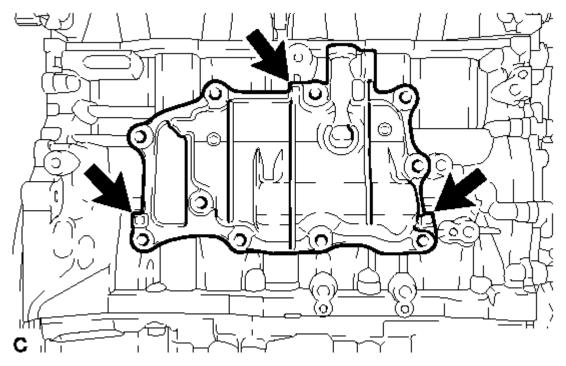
Locating Contact Surfaces Of Cylinder Block And Ventilation Case
